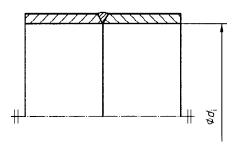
V extrusion butt weld (X weld permitted for larger sizes)
